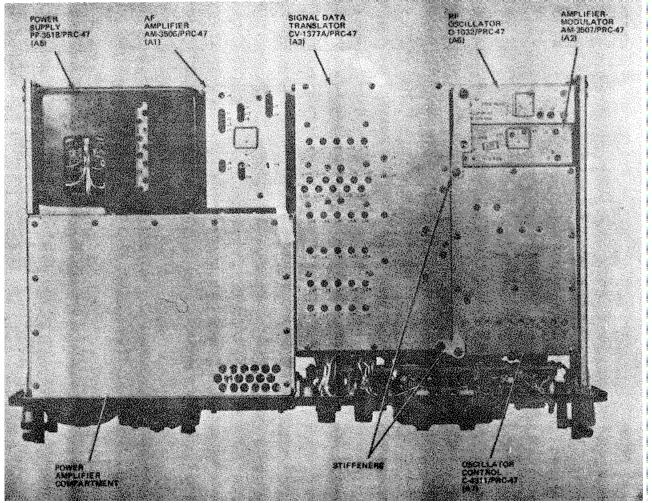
Radio Receiver-Transmitter RT-671/PRC-47, (A8) Top View, Location of Modules and Stiffeners.
